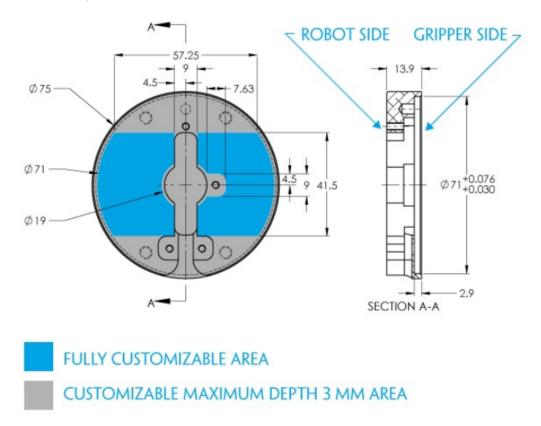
Workable area dimensions of blank coupling AGC-CPL-BLANK-002
